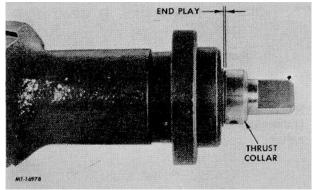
Checking Distributor Shaft End Play (Housing-to-Thrust Collar Clearance) (Typical)
